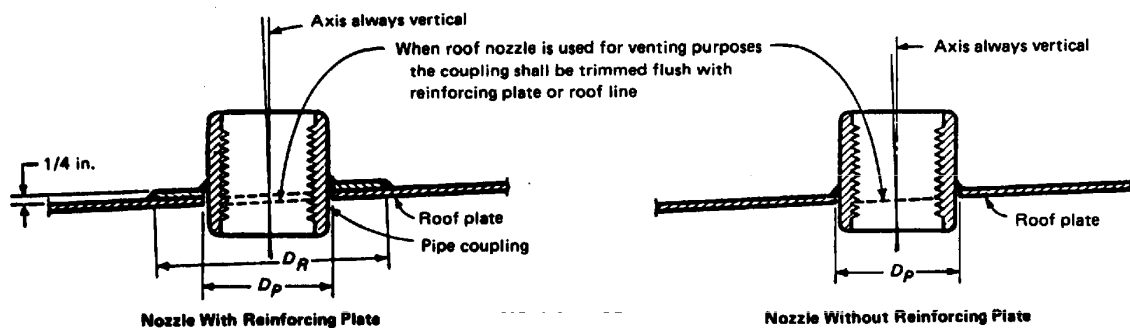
(a)-2 SCREWED OR SOCKET WELD ROOF NOZZLES
